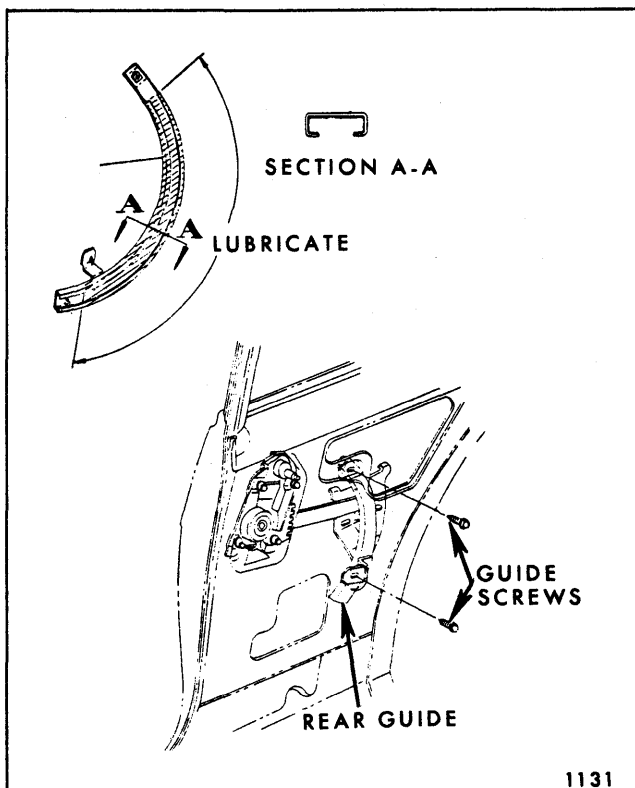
Rear Quarter Window Guide - "X-11" Styles
